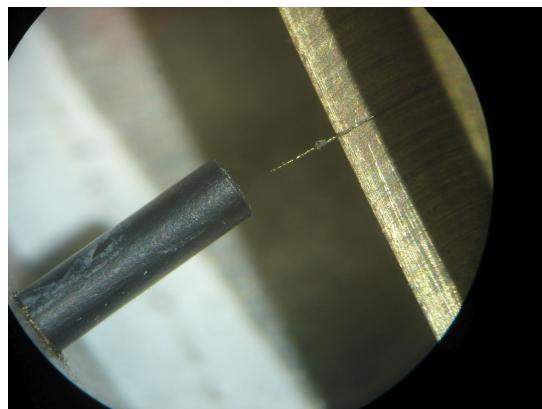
A microphoto of a twisted wire ready to be welded. The black carbon electrode is 2 mm in diameter.
